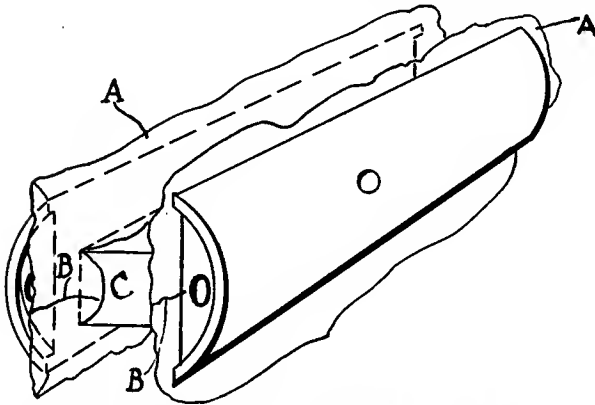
Showing the first step in insulating. A, pieces of muslin, cut to B B to enable them to be slipped over core. C, central body of core.
